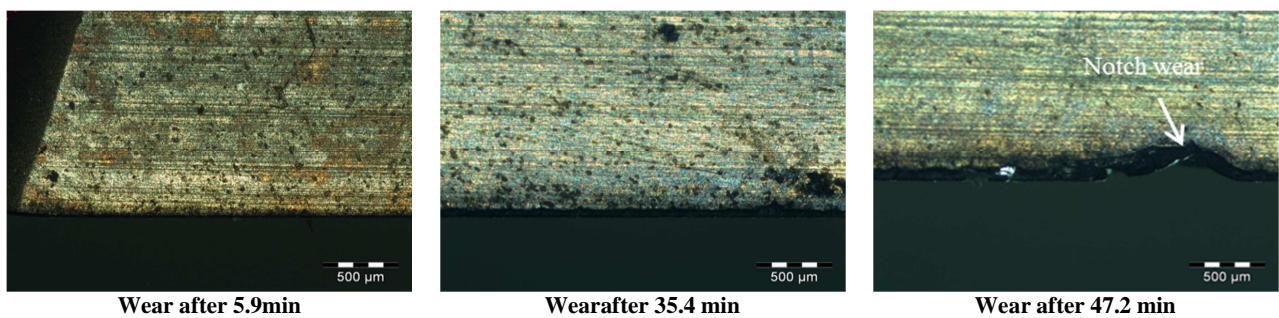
Wear scar progression for magneto-abrasive machining coating treatment under air blow cooling (dry cutting) conditions, machining 40CrMnMo7 with SECO inserts
